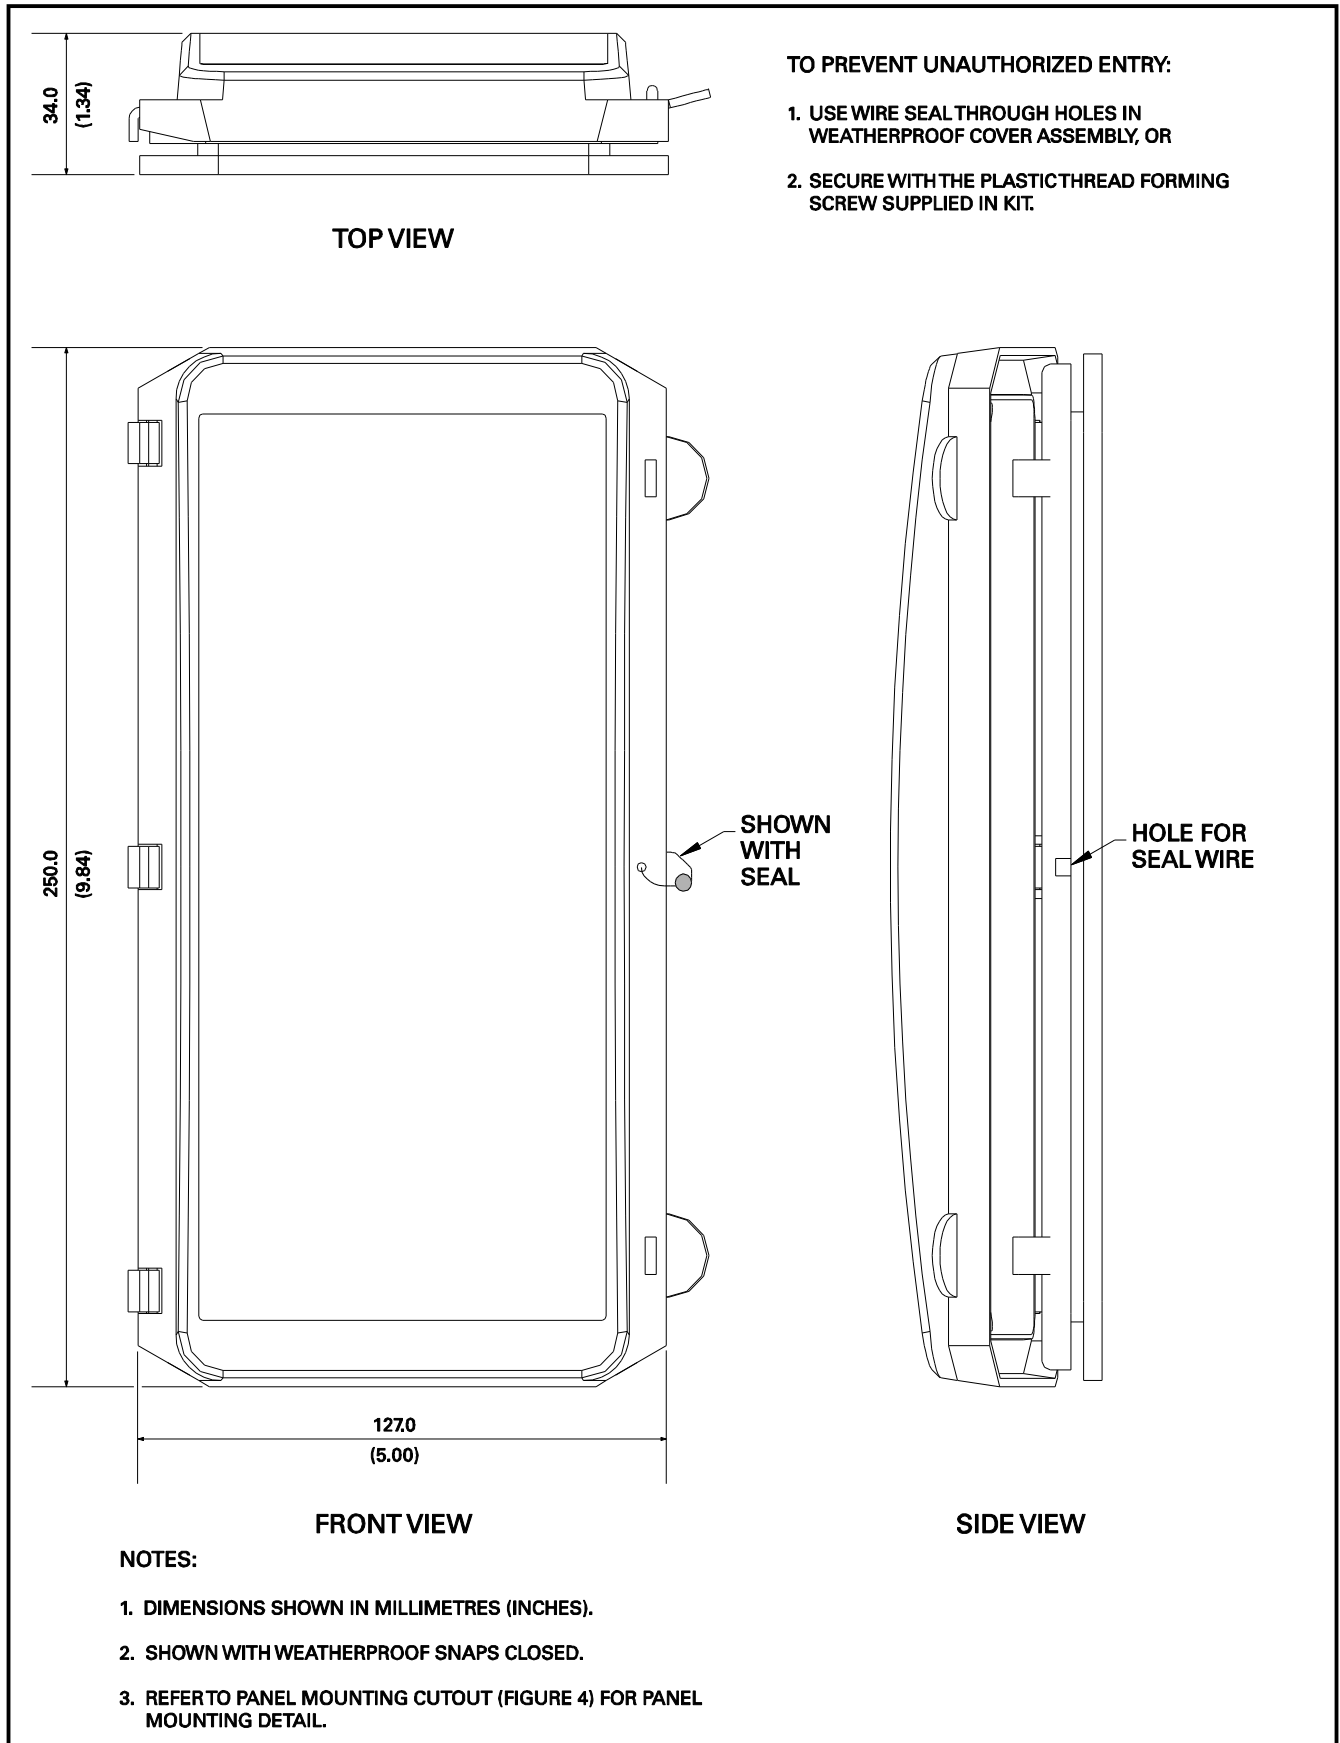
SE-IP65CVR-G Weatherproof Cover Outline.
